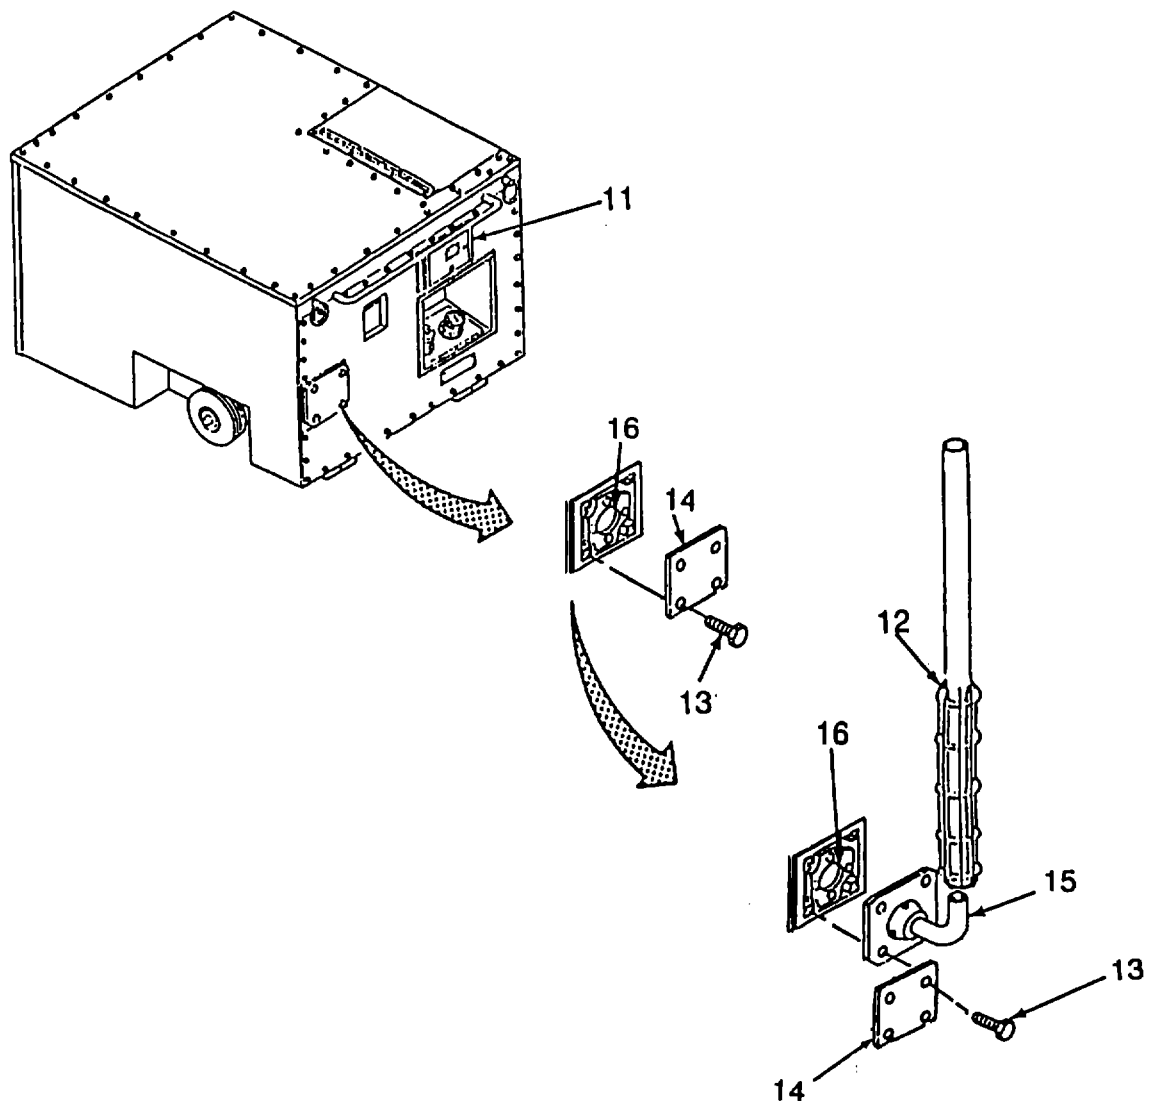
Assembly of Equipment (Sheet 2 of 2 )
